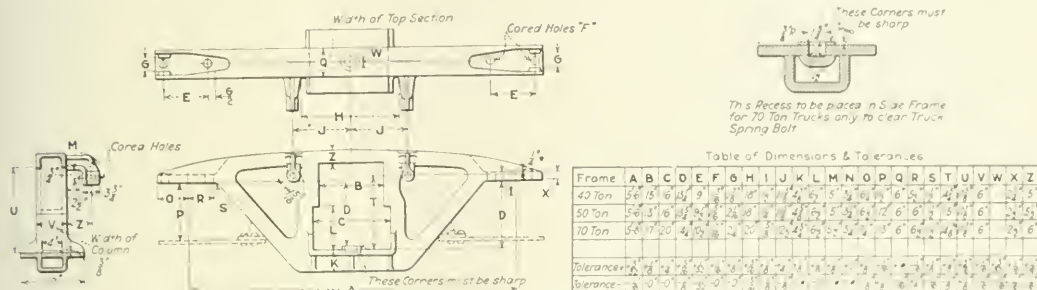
Limiting Dimensions for the Cast Steel Truck Side Frames
